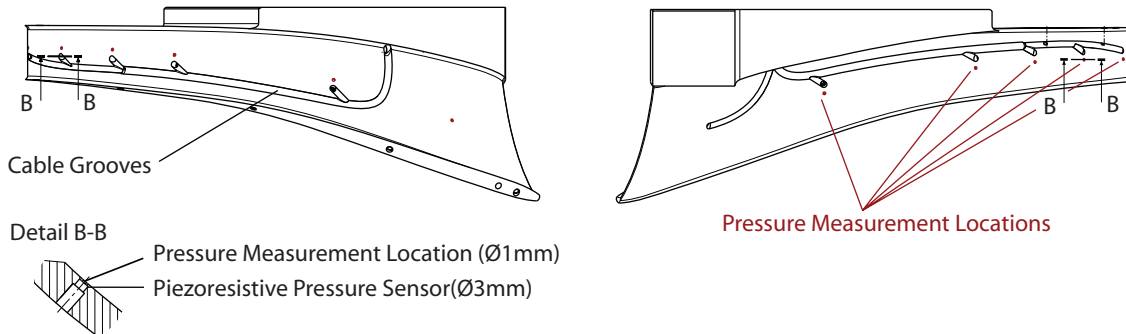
Embedded pressure sensors in pump-turbine impeller blade
